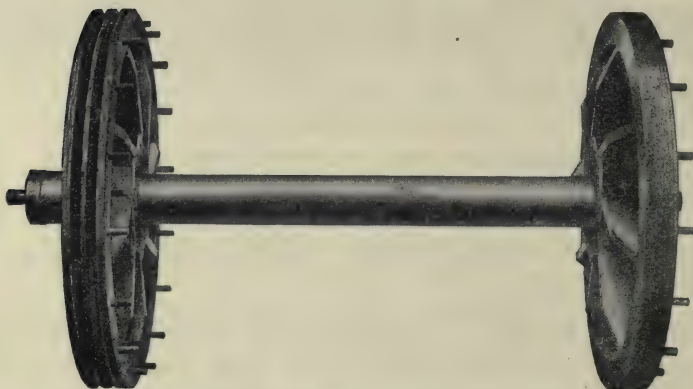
BULL WHEELS BUILT ON R. & S. IRON SHAFT
